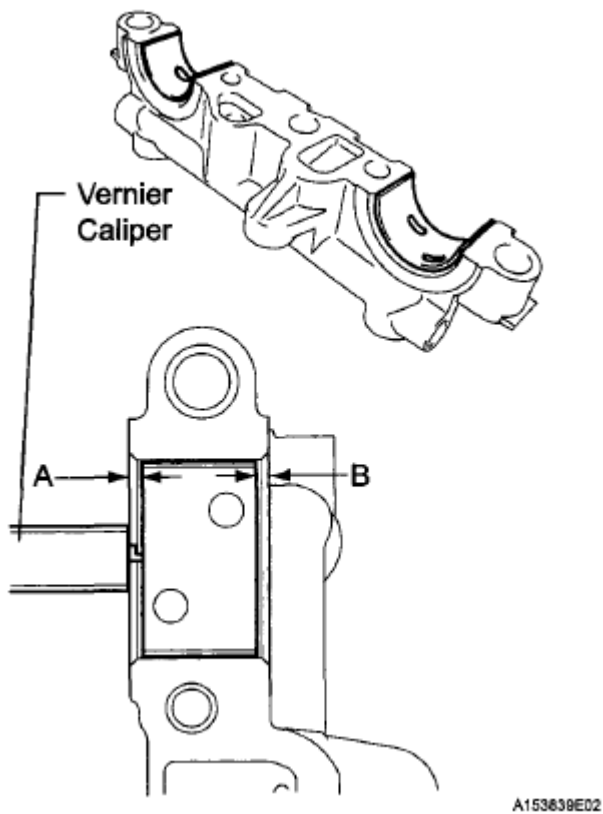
Measuring Distance Between Bearing Cap Edge And Camshaft Bearing Edge
